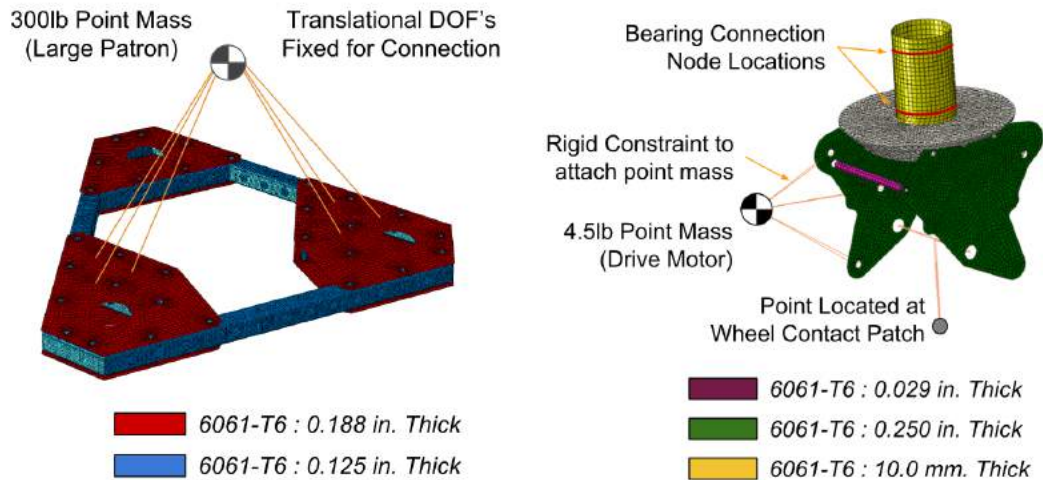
Finite Element Models of the Chassis Assembly (Left) and Wheel Assembly (Right).
